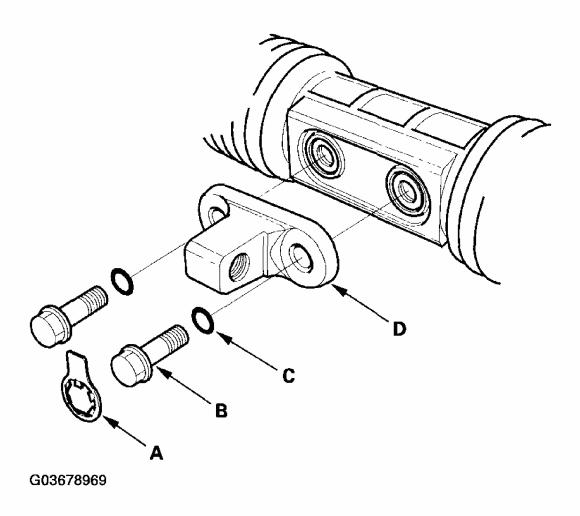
Removing Stop Washer, 12 Mm Flange Bolts, O-Rings And Bracket From Steering Gearbox
